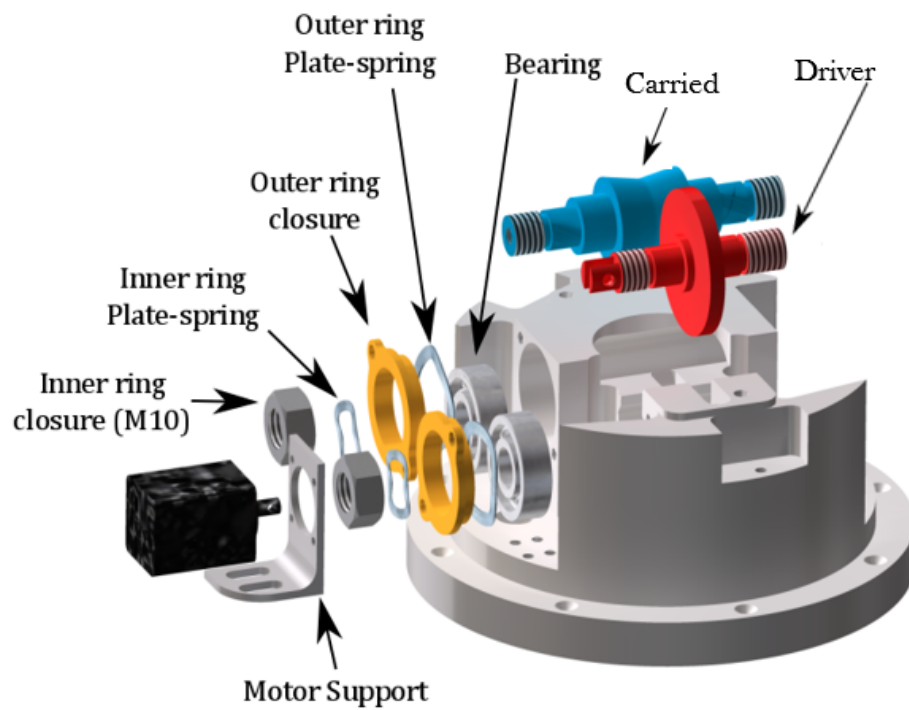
Exploded view of the motor mount. ADAPTED[19]
